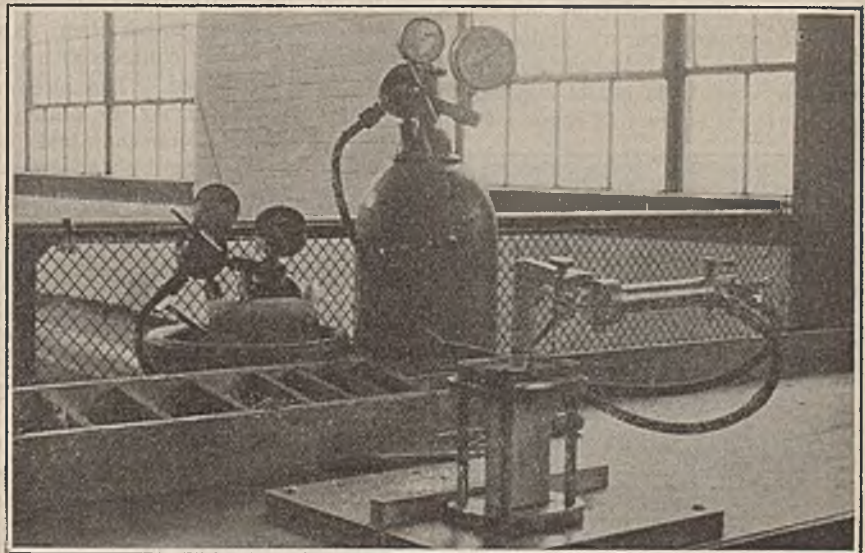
Covers Are Welded in Position by Oxyacetylene Torch
